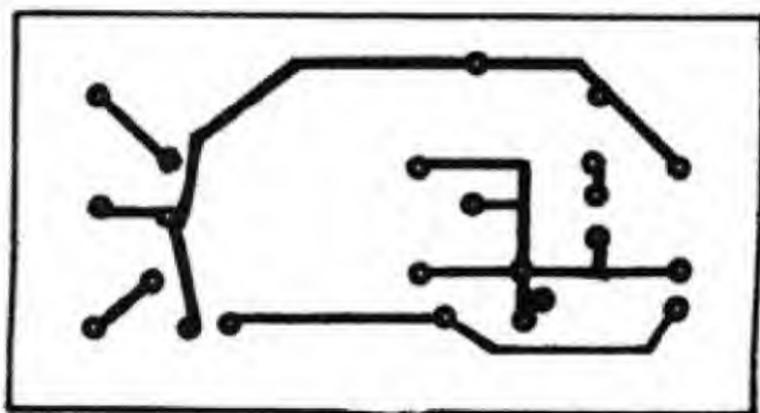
PCB layout for the circuit shown in Fig. 8.
